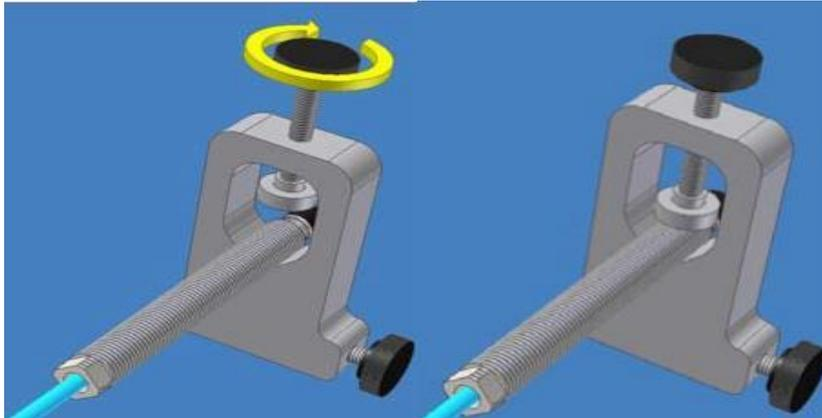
Clamp Probe by Rotating Thumbscrew
